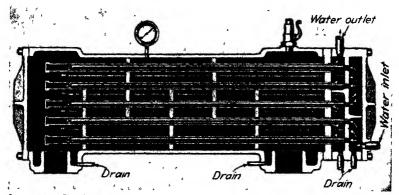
Double-tube construction eliminates expansion and contraction troubles. (Courtesy of Bury Compressor Co.)
